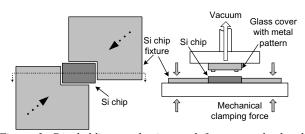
Die holding mechanism and fixture on the bonding equipment: (left) top view of the silicon die fixture, (right) side view of the whole mechanism
